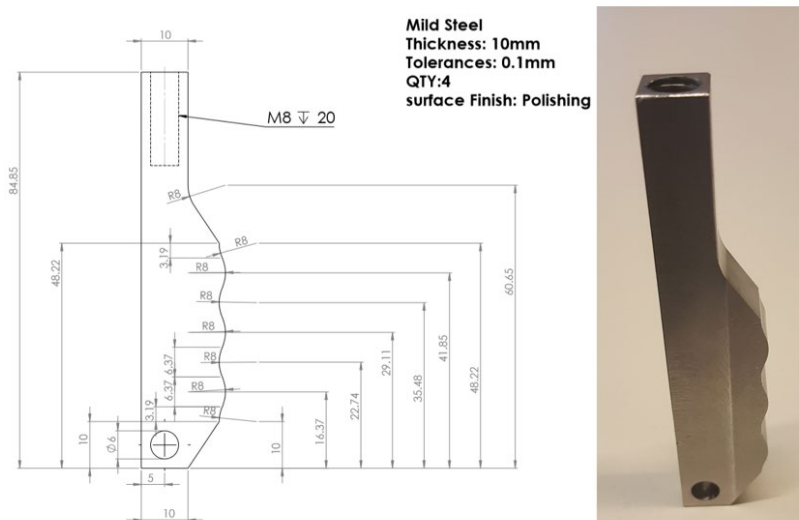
The mechanical design and the photo of a fabricated part of the cam structure.
